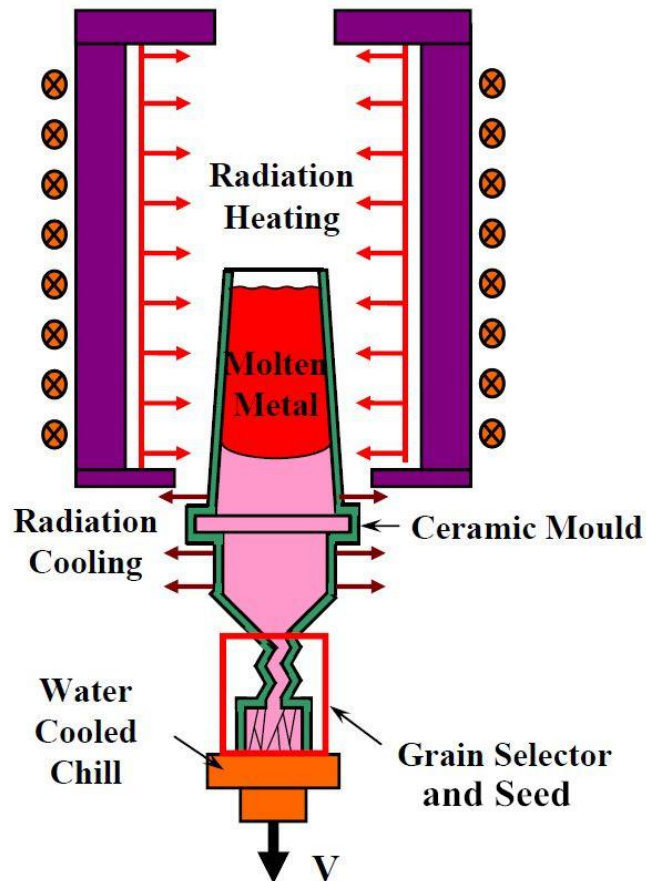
Schematic diagram of investment casting for SX turbine blades [38]
